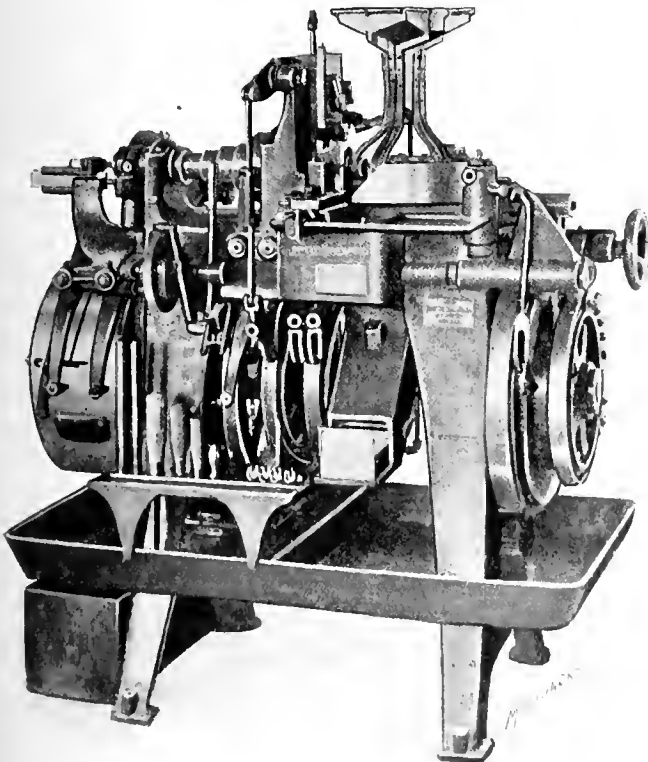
Davenport Automatic Machine for Assembling and Turning "Lantern" Pinions
